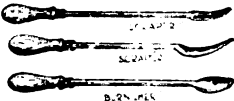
Bearing scraping tools which can be secured at any supply house or made of old files.
